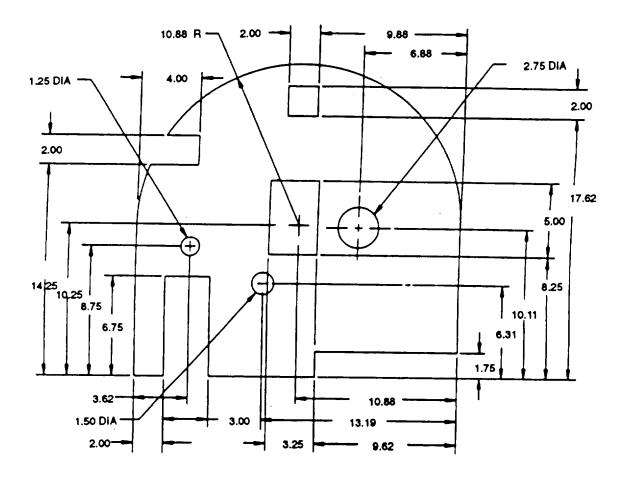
Acoustical Foam, Sound Enclosure, Front Panel Assembly
